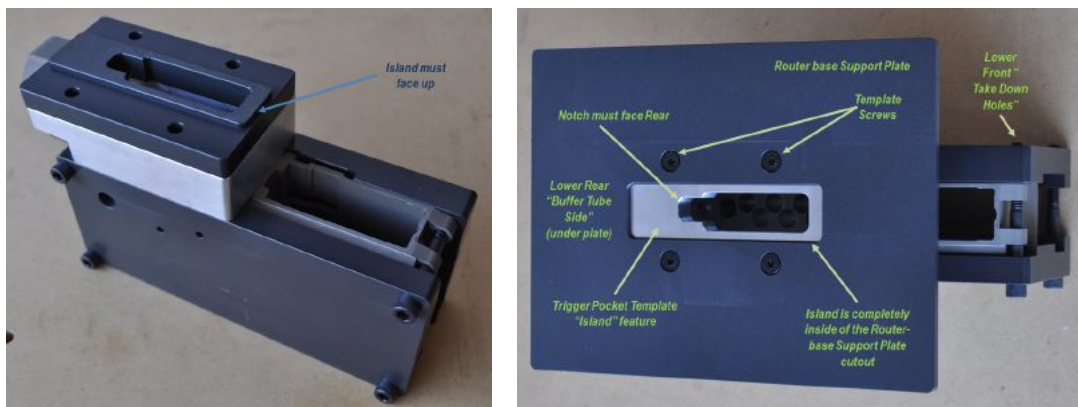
Trigger pocket orientation shown the "island feature" and proper orientation (Silver parts are used for clarify, all jig parts are the same color)
